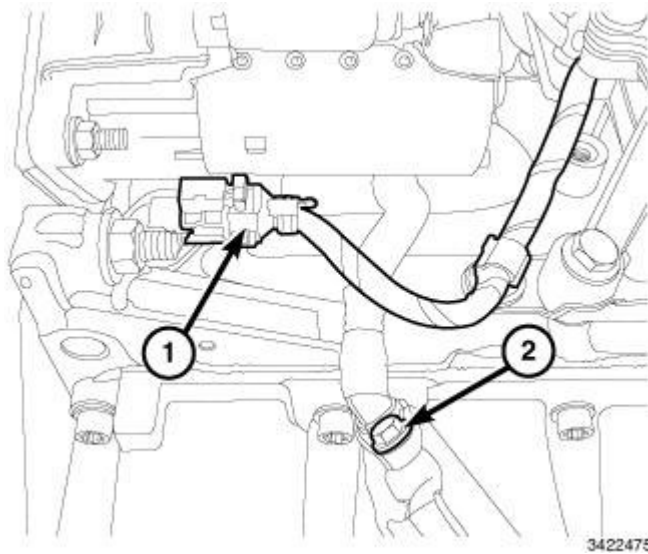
Crankshaft Position Sensor Harness Connector & CCV Tube Bolt
